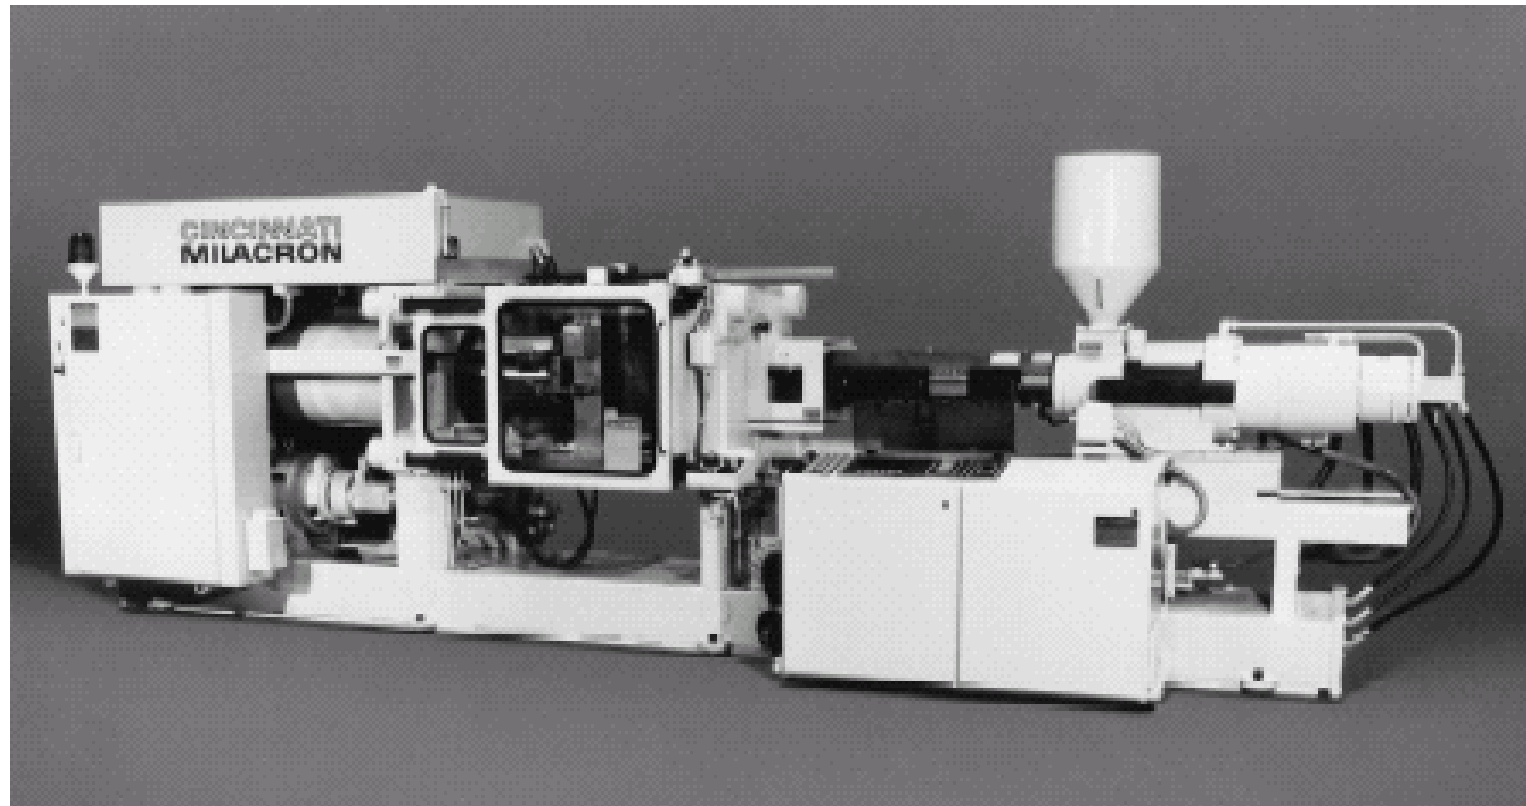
MN (250-ton) injection molding machine. The tonnage is the force applied to keep the dies closed during injection of molten plastic into the mold cavities.
